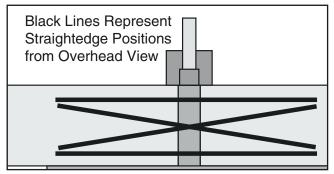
Straightedge positions for checking infeed/outfeed table parallelism.
